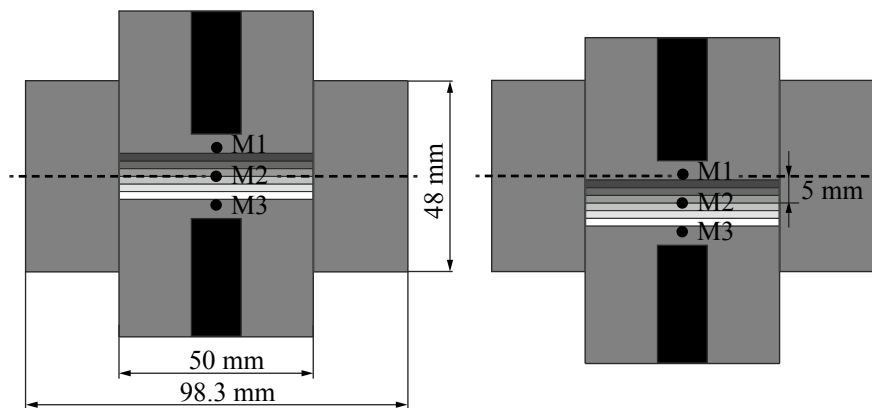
Sintering tool setup, a symmetrical tool setup, b asymmetrical tool setup—FGM sample shifted by 5 mm downwards
